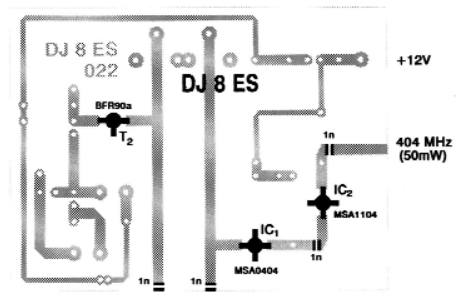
Component layout of the LO on the 70cm transverter showing the track side of the PCB and the positions of the SMD components
